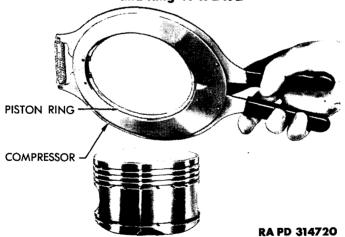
Installing Piston Rings Using Applier 41-A-329-500
